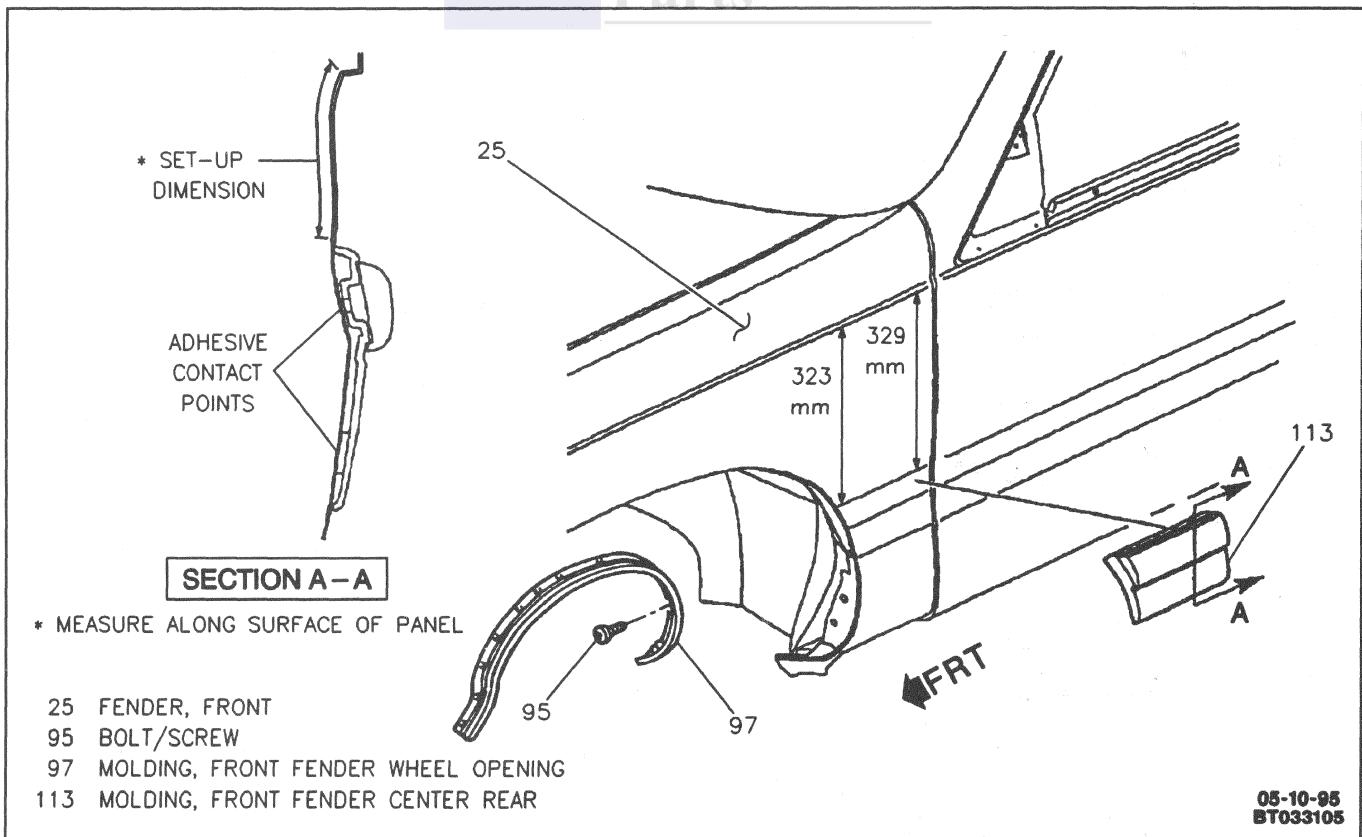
Front Fender Center Rear Molding-(Buick Sedan)
